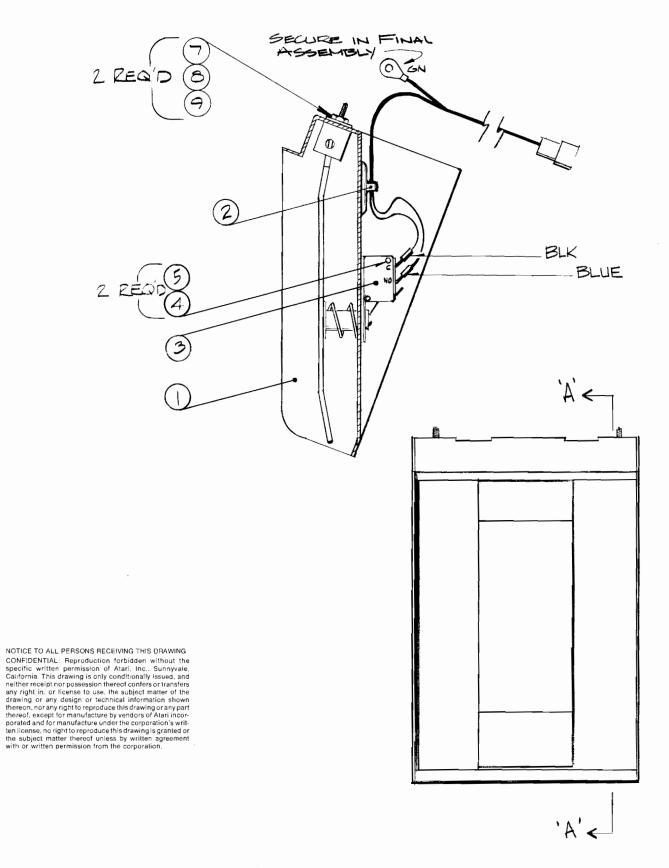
Single Foot Pedal Assembly with Harness Assembly A008845-01 C
